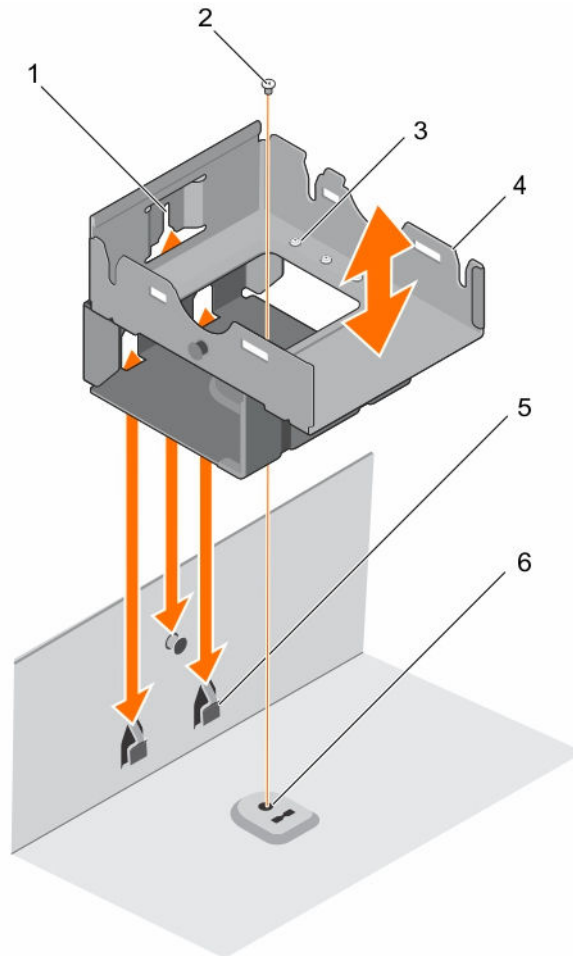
Removing and installing the 2.5 inch internal hard drive cage
